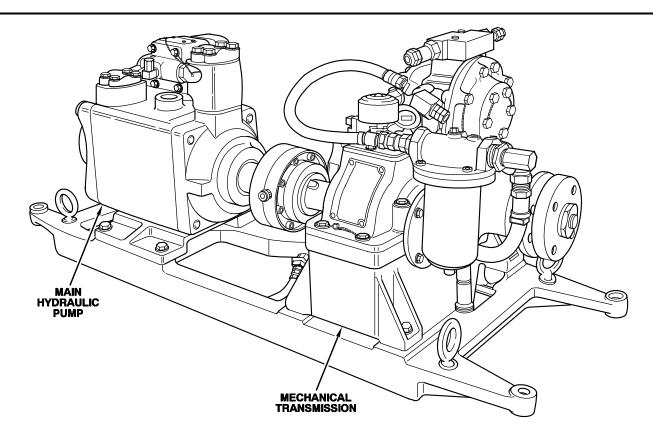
Mechanical Transmission and Main Hydraulic Pump Assembly—Right-Rear View.
